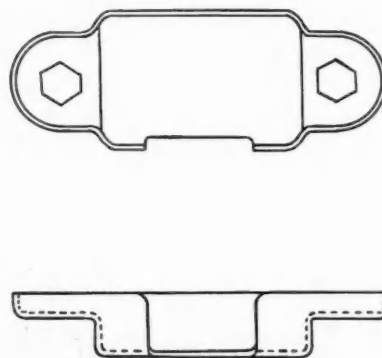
This dovetail pocket stamping is a typical press shop job + + +
